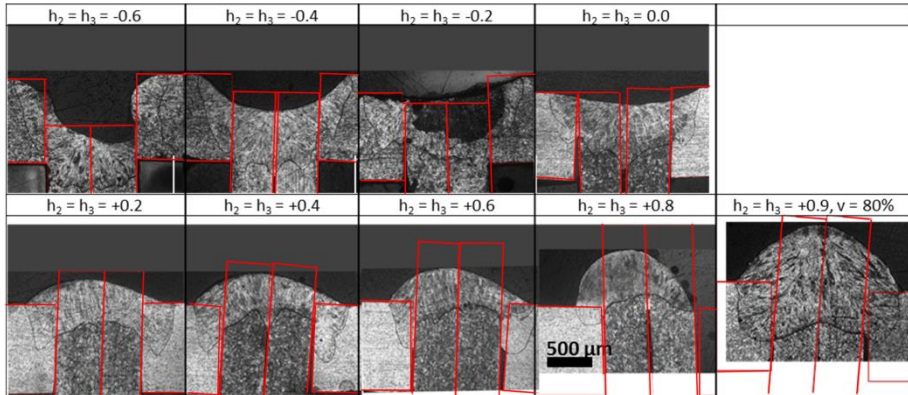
Double butt joints with increasing height of centre sheets. All welds are performed with four or five spots and similar parameters. Initial geometry is outlined.
